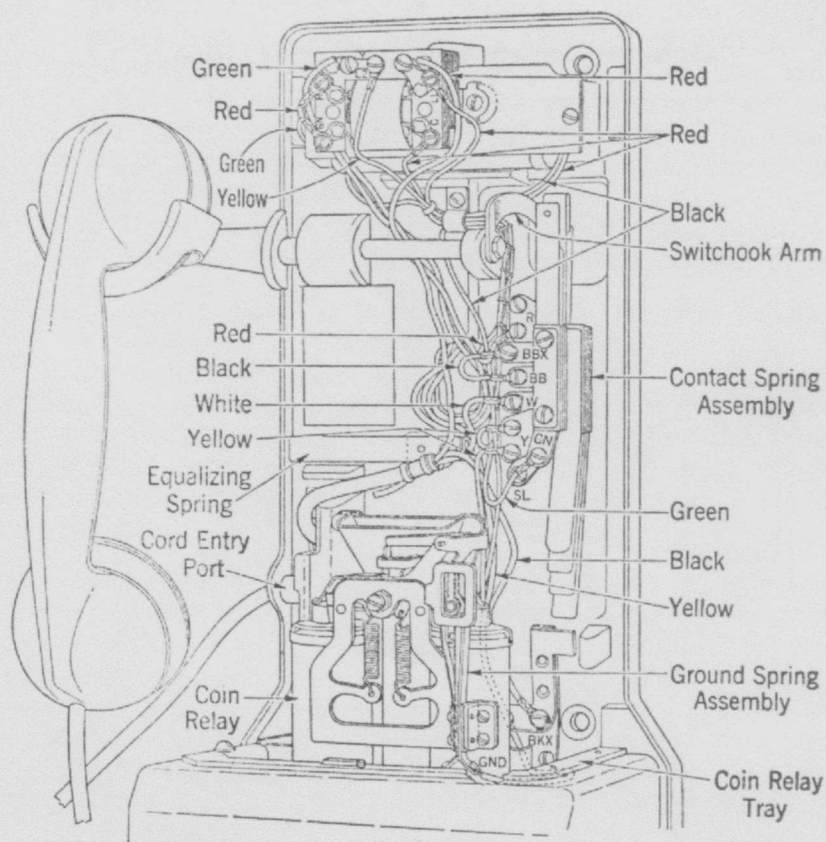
New Hand Set Coin Collector—Backplate Assembly
